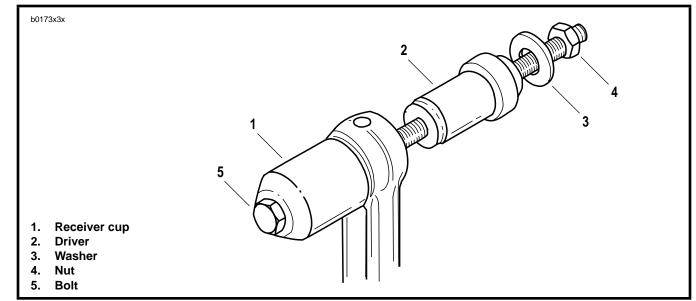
Piston Pin Bushing Tool Assembly for Bushing Removal
